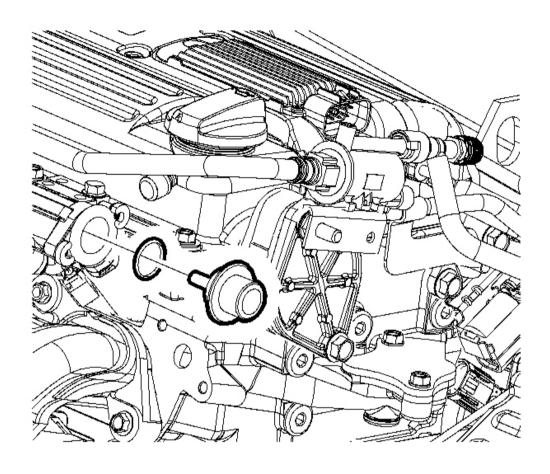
View Of Fuel Pressure Regulator Courtesy of GENERAL MOTORS CORP.
